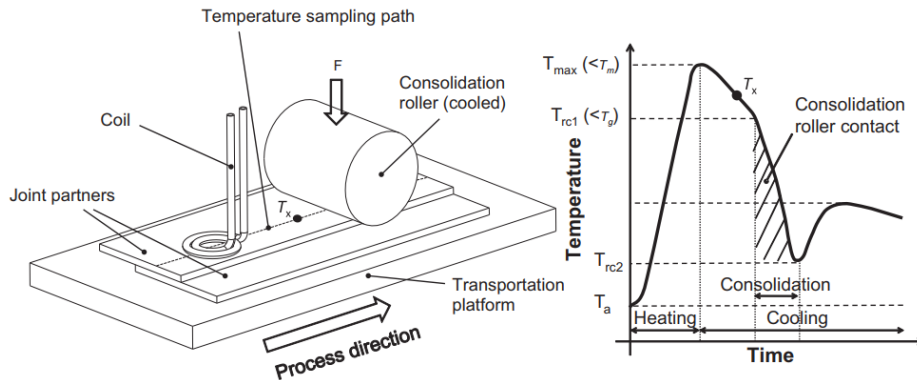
Setup example for continuous induction welding [33]
